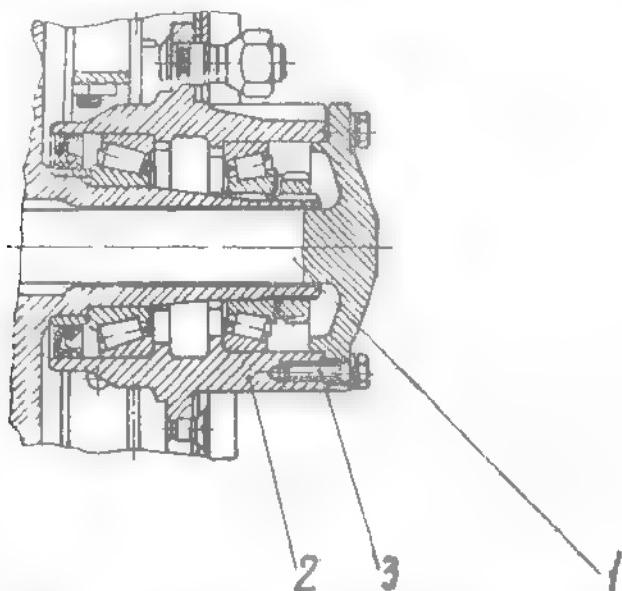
REAR AXLE DRIVE SHAFT FASTENING ON WHEEL HUB
